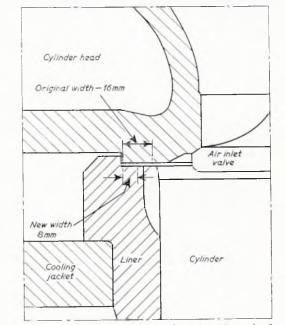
Fine concentric groove machined in the cylinder cover opposite the new gasket
